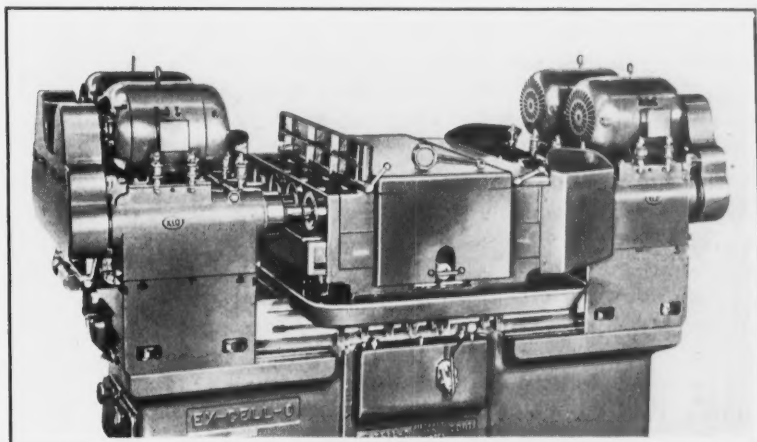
Connecting-rod Bearings are Finish-bored within Close Limits of Accuracy on This Machine at High Production Rates
